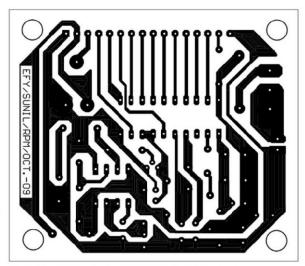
Actual-size, single-side PCB for the RPM counter using microcontroller AT89C4051
